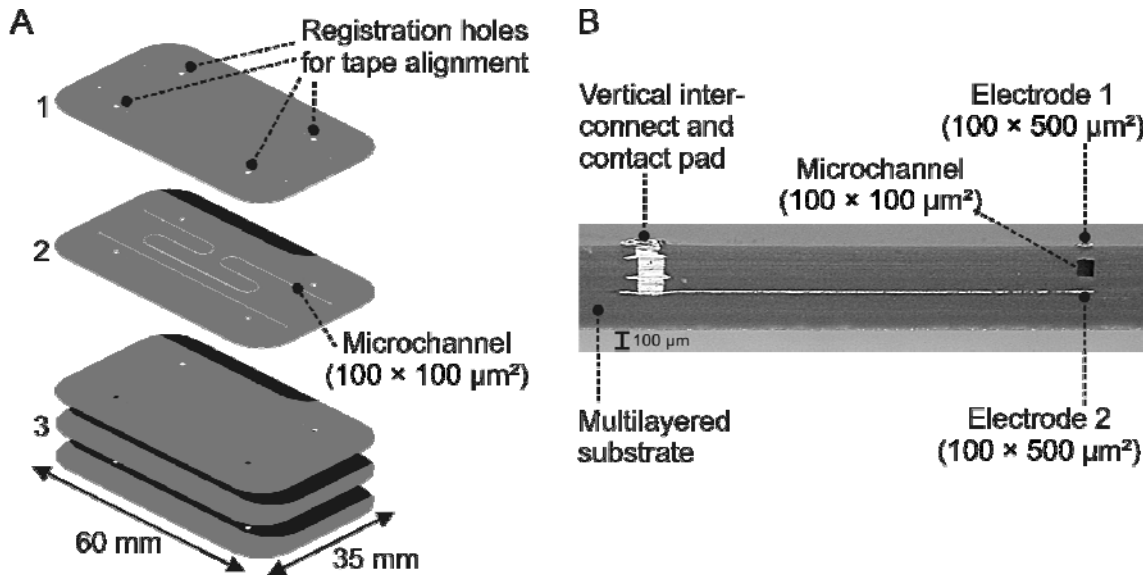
Exploded view (a) and cross-sectional photograph (b) of the fabricated CE-module. (1) cover layer with electrode contact pads, fluid inlet/outlet ports and registering holes; (2) middle layer comprising separation channels; (3) three bottom layers for mechanical support.
